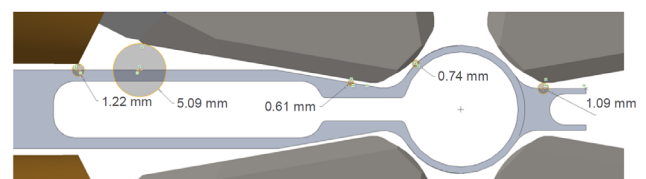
Cross-sectional view of a SST keyhole chamber within a quadrupole magnet.
